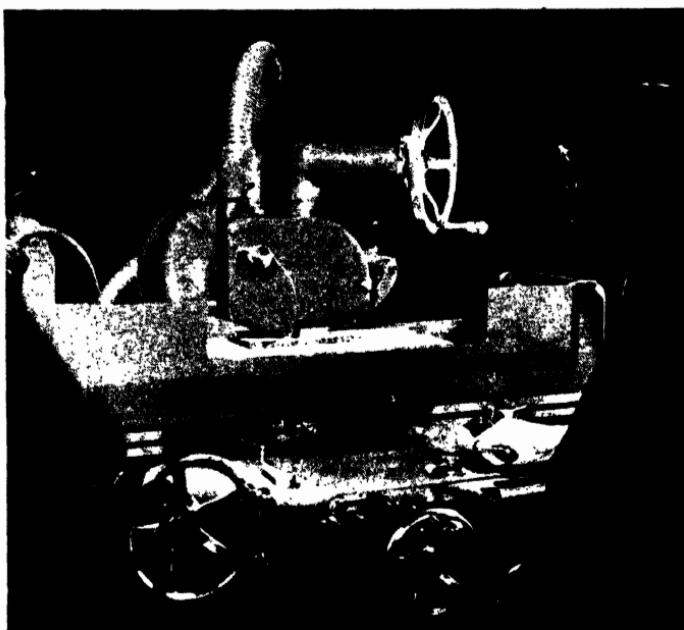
Surface grinder with inclosure guard and exhaust system. (*Courtesy of the Norton Company.*)
